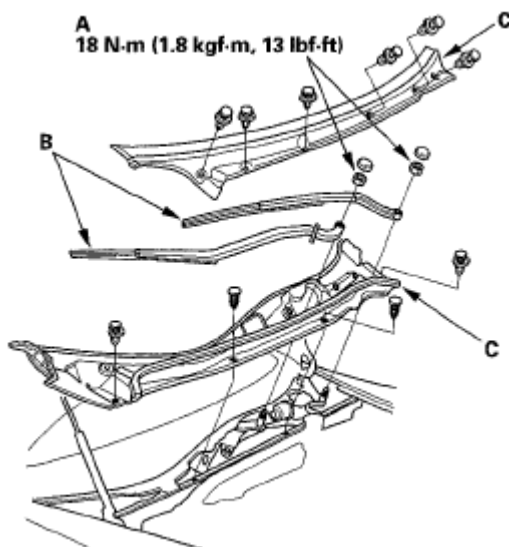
Identifying Windshield Wiper Arms With Torque Specifications
